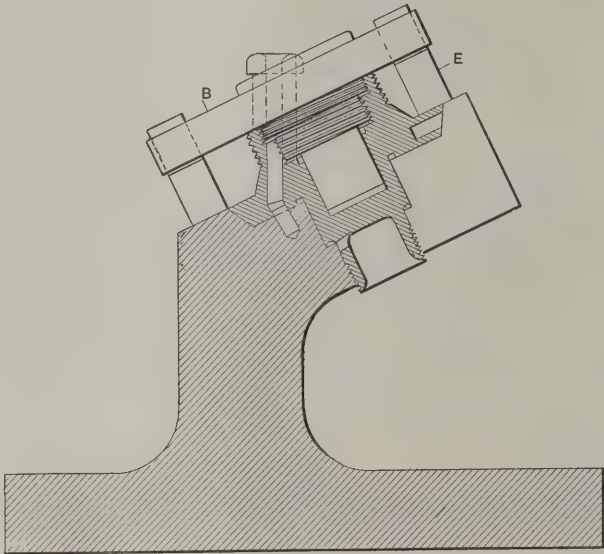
Jig for Drilling Angular Hole in Percussion Fuse.
